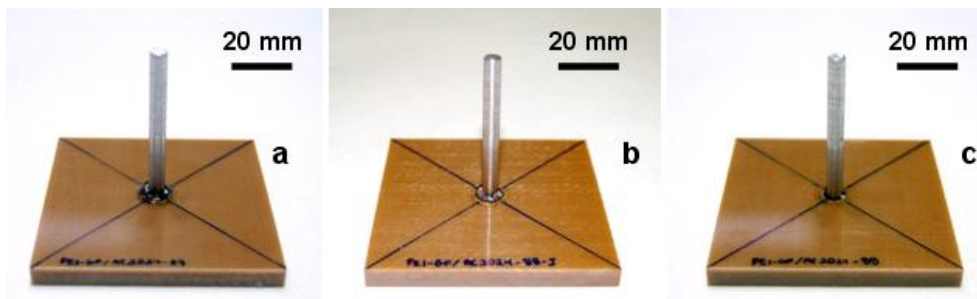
Surface views of the T-pull test specimens for PEI-GF/AA 2024-T351 joints prior to testing (a – plain rivet, b – hollow rivet, c – hollow-threaded rivet)
